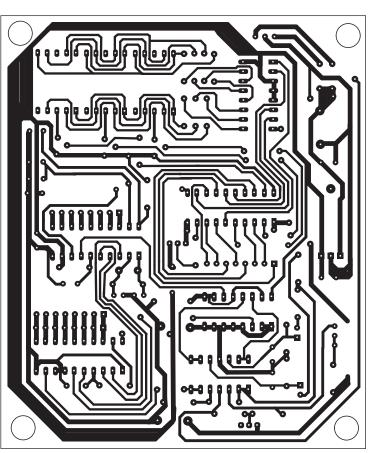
Actual-size, single-side PCB layout for microcontroller-based call indicator
